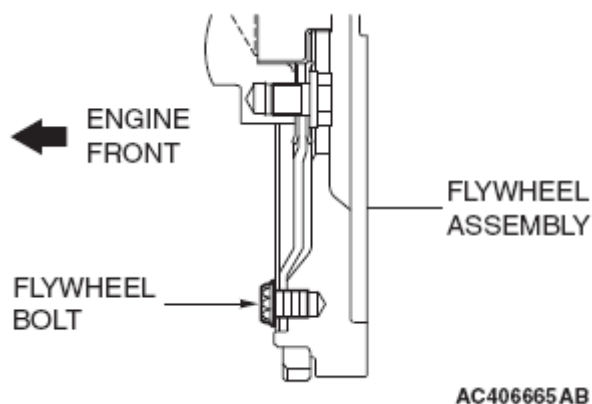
Identifying Flywheel Bolt And Flywheel Assembly
